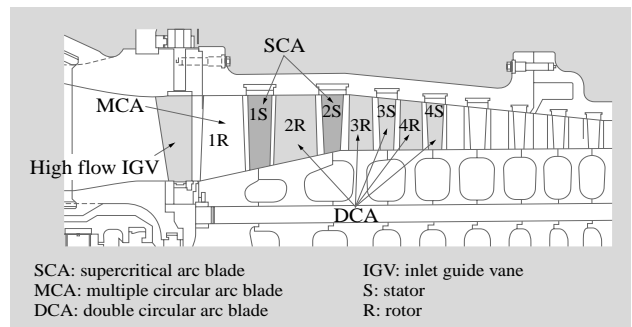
Compressor Technology for H-25 Gas Turbine. These are the types of compressor blades used for the H-25 gas turbine.
